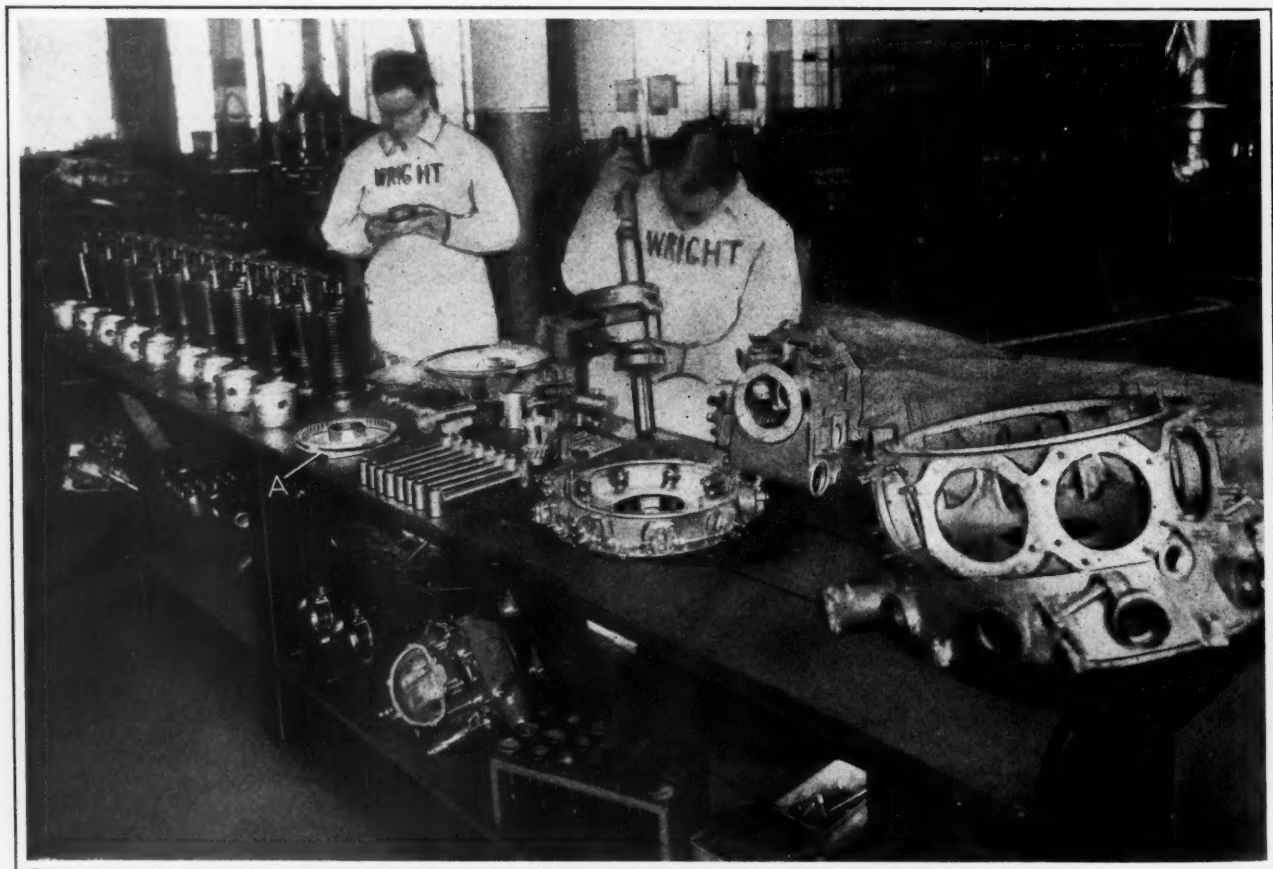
Parts of the "Whirlwind" Engine Ready for Assembling
